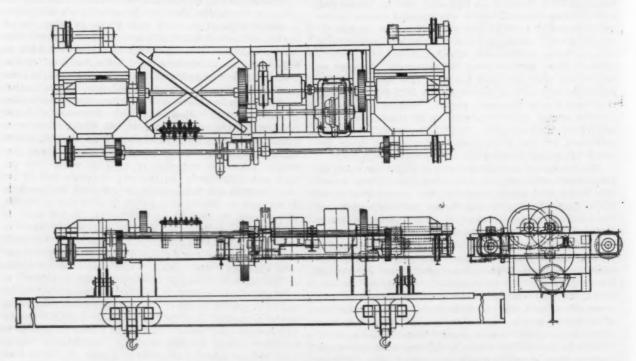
Type of Beam Holst Crane Used in Structural Plants, Built by the Standard Bridge Tool Company.
